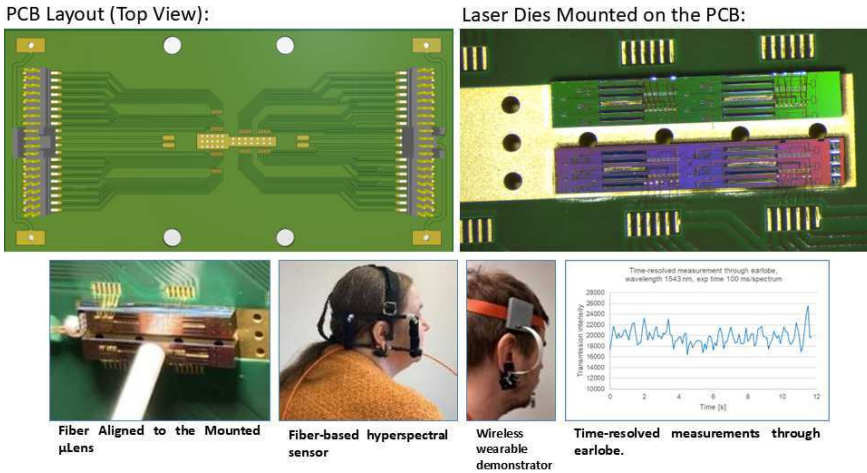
PCB layout by VTT (Top Left). Two Laser dies mounted and wirebonded to the PCB (Top Right). Two prototype configurations as fiber-based and wireless wearable Hyperspectral sensors with the time-resolved measurements of heartbeat through the earlobe.
